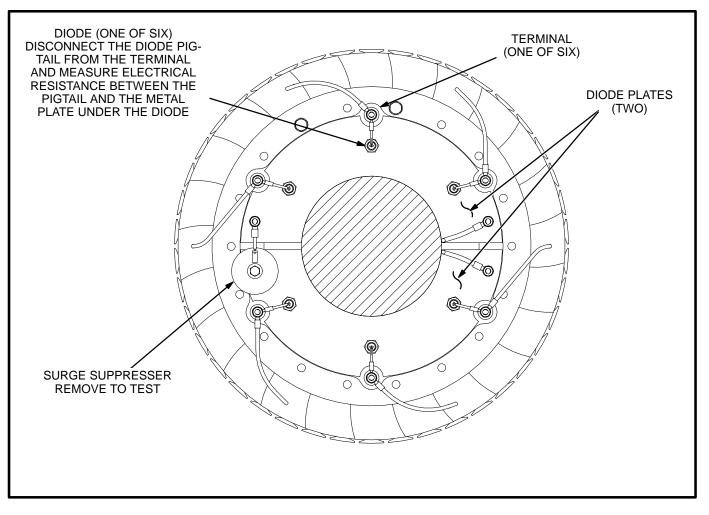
TESTING THE ROTATING RECTIFIER ASSEMBLY
